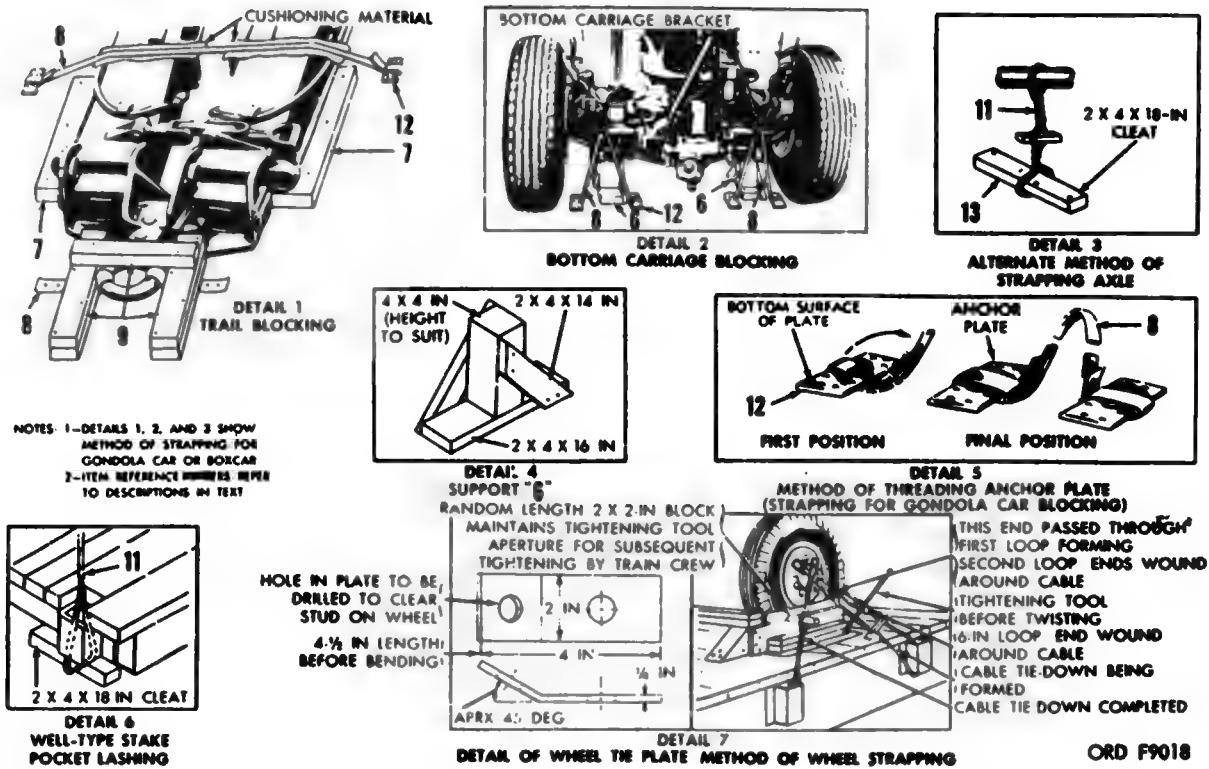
Method of blocking 155-mm cannon on carriage M1A1 for rail shipment—blocking details.
